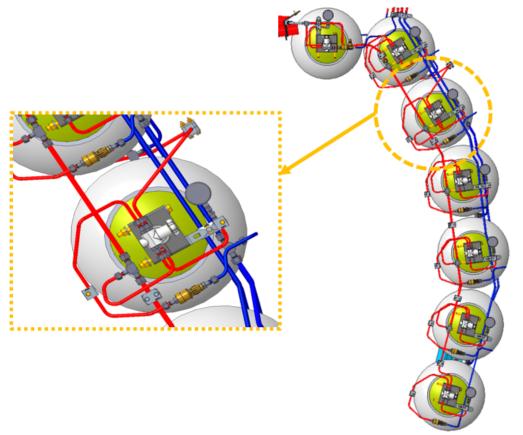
Defueling Tube Assembly for New Heil System - Launched in April 2024
